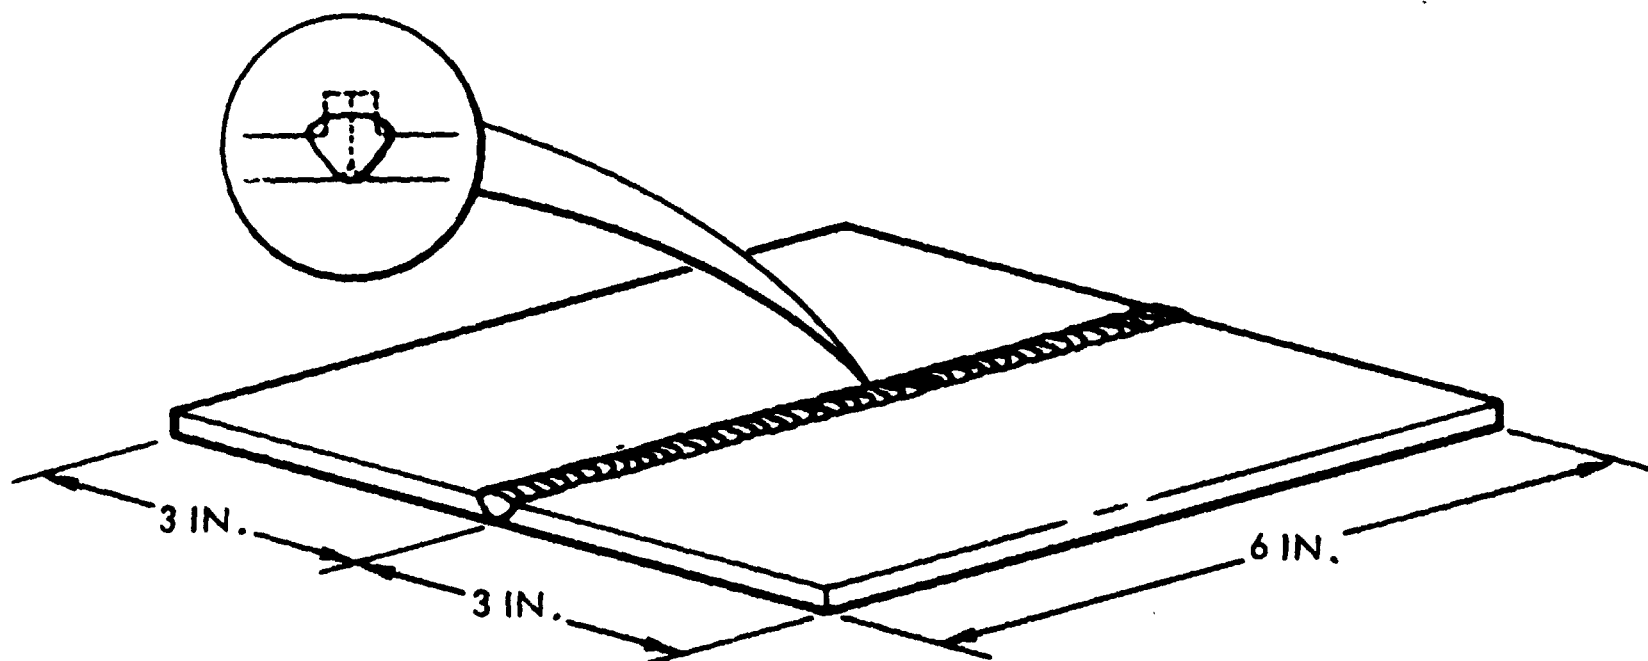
Flange Weld Joint Specimen (Manual)
